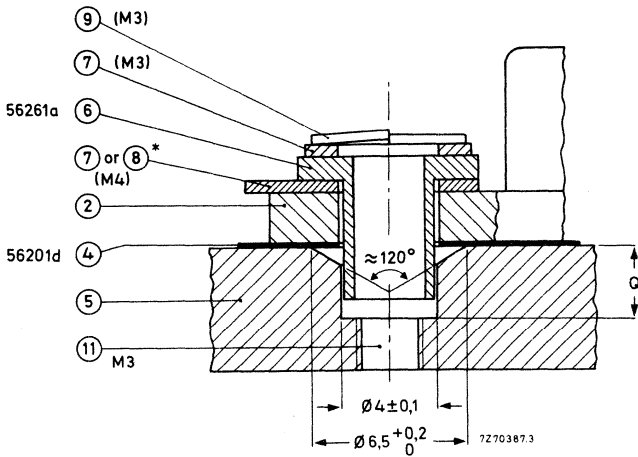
Assembly (partial) for Fig. 10 - tapped holes.
